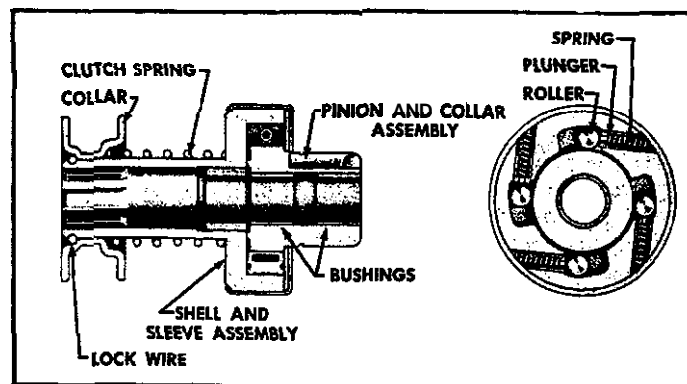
Sectional View of Overrunning Clutch showing details of construction and Location of Rollers in Clutch
